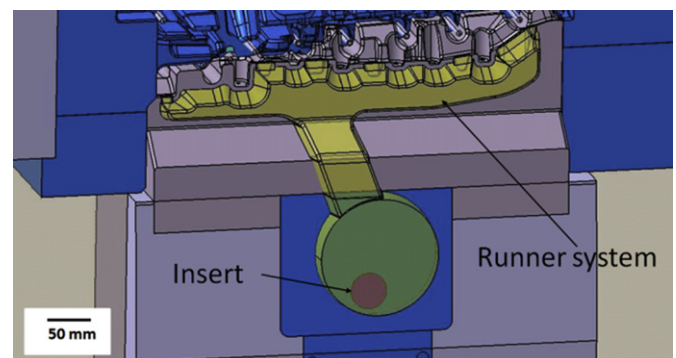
Images showing the position of the runner system relative to the shotplate insert on slide 3.
